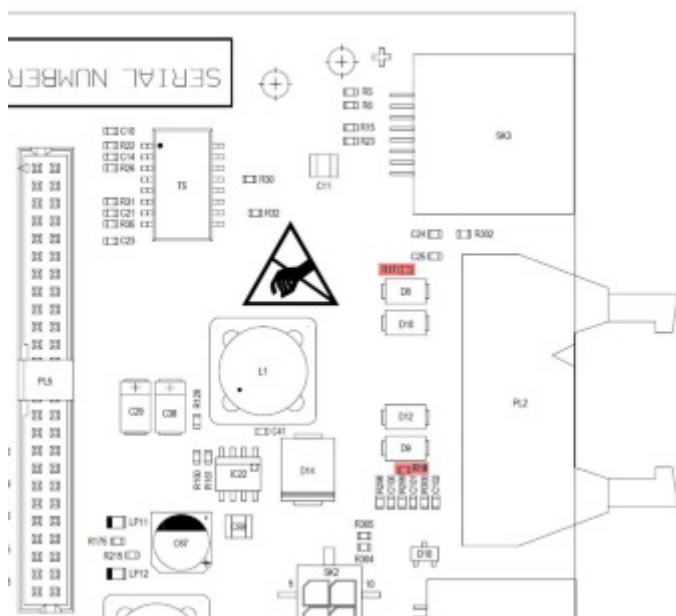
Layout drawing of MIDAS-IP carrier card showing positions of R17 & R18
